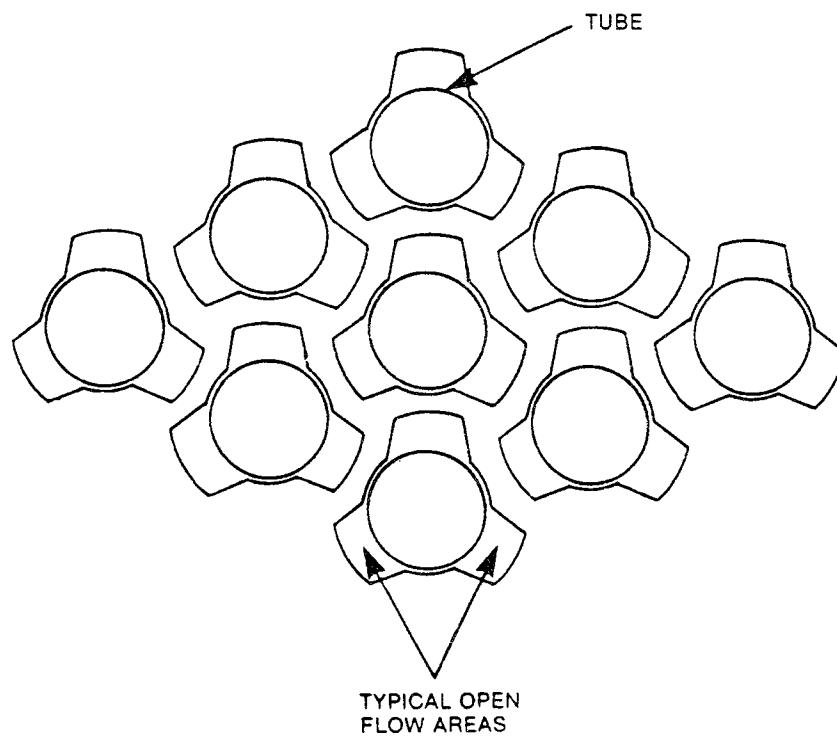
TUBE SUPPORT PLATE USING TRILOBAR BROACHED TUBE HOLES
